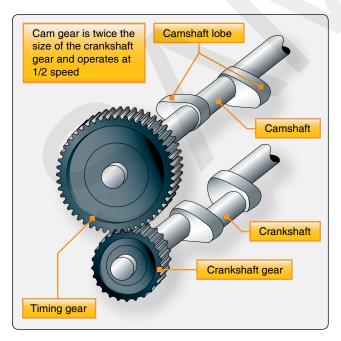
Cam drive mechanism opposed-type aircraft engine.
